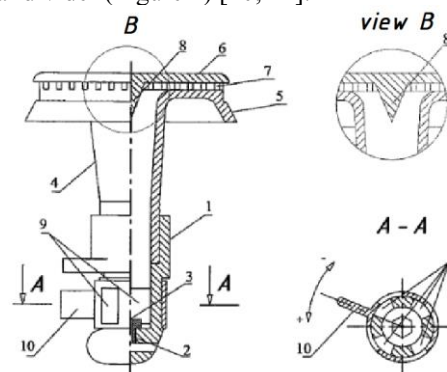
The design of the gas burner device: 1 – housing; 2 – gas nozzle; 3 – axial outlet; 4 – mixer; 5 – outlet end of the mixer; 6 – lid; 7 – firing holes; 8 – divider; 9 – primary air supply holes; 10 – primary air supply regulator
